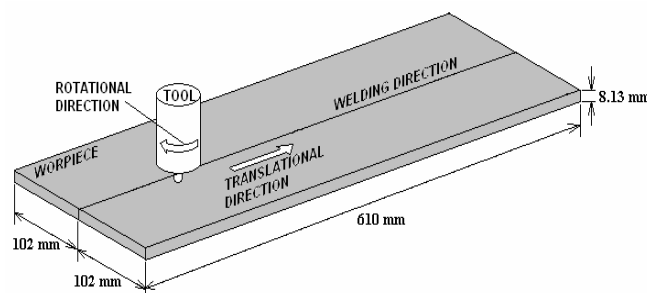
Geometry configuration of friction stir welding (FSW).
